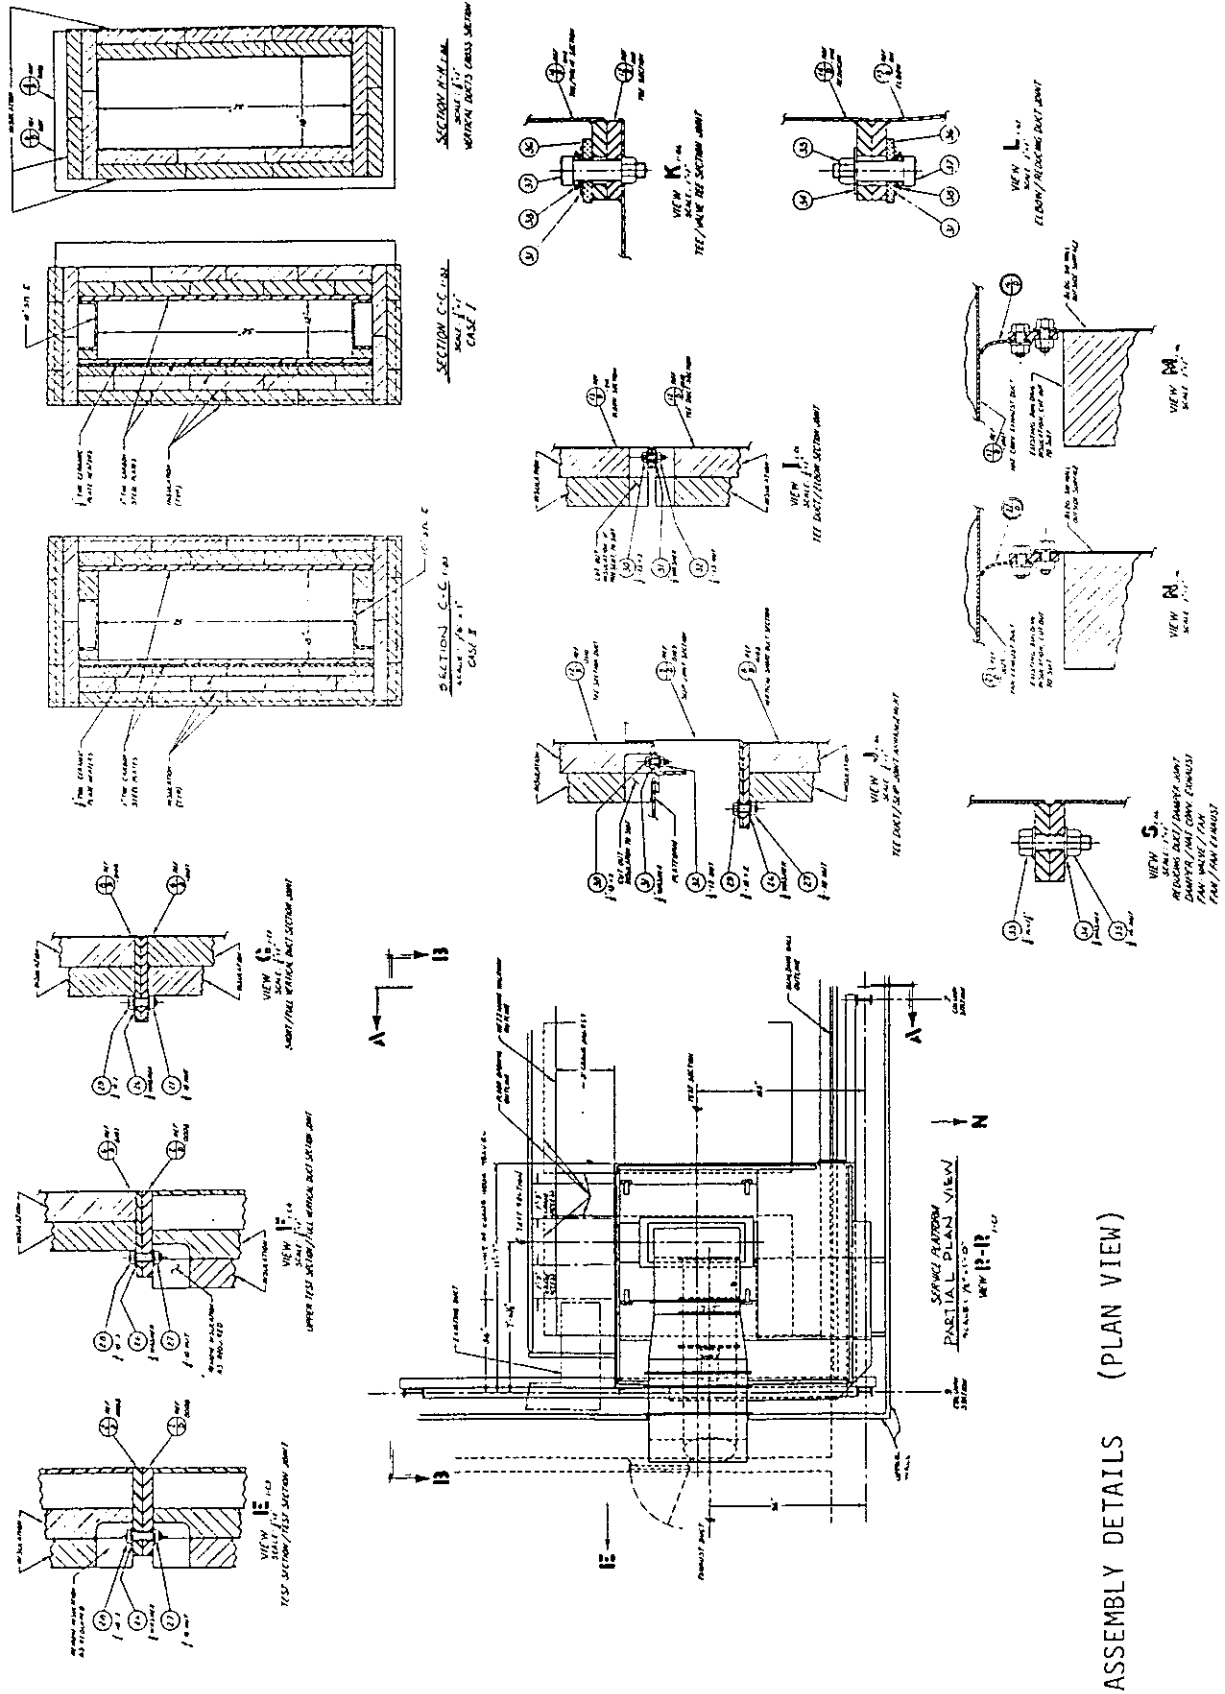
Assembly Details of the Test Assembly (Reduction of ANL Dwg. No. R0408-0004-DE, Sheet 2 of 4).
